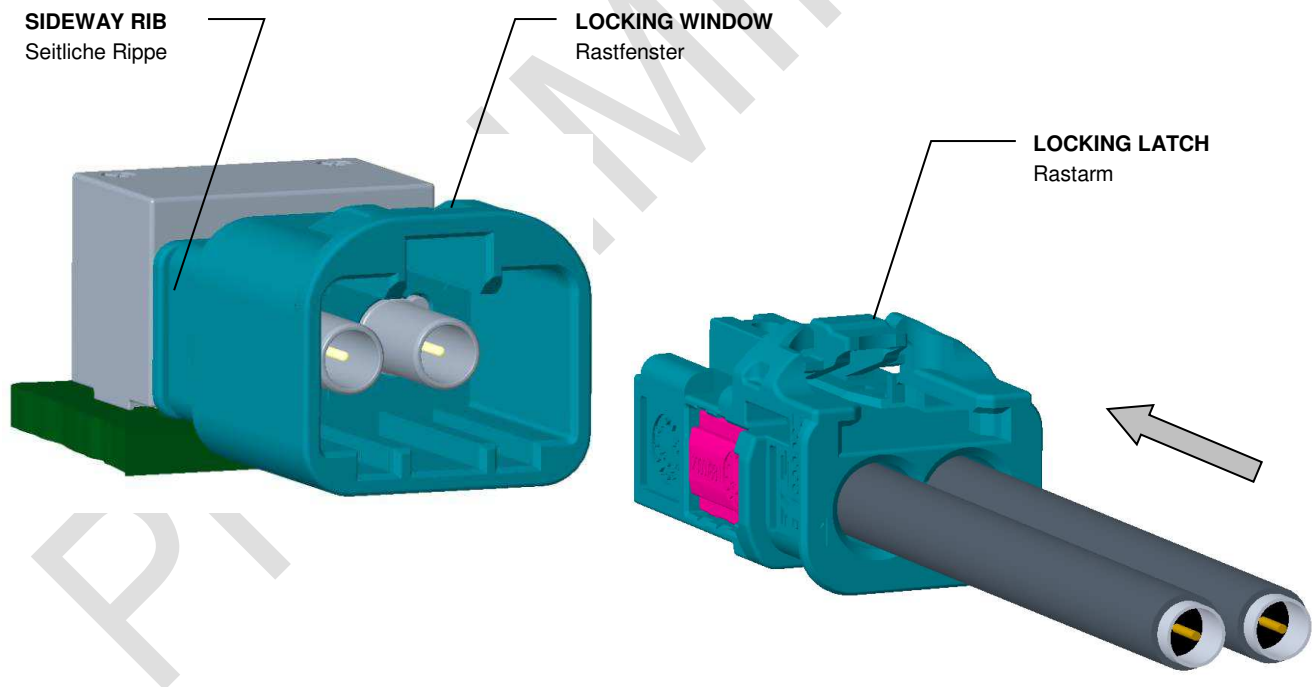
Assembly with cable connector / Montage mit Kabelbaumsteckverbinder
